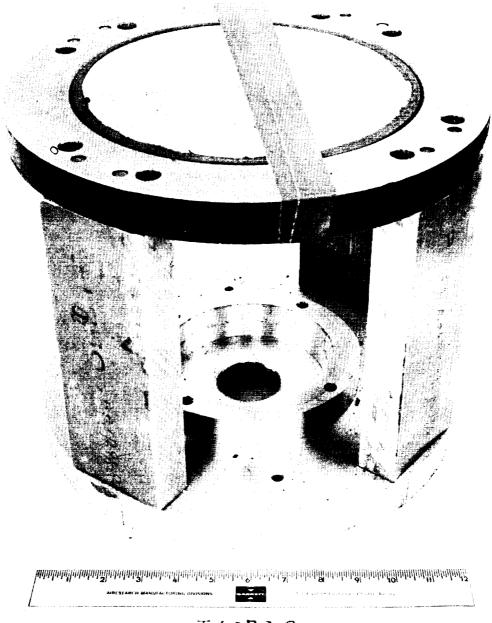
Trim Fixture (Tool No. T-607305)
